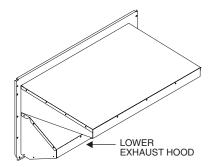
Outdoor Air Hood Assembly (Horizontal EconoMi\$er)
